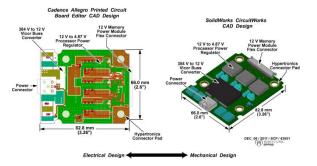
Example of electrical to mechanical 3D CAD translation used in 3DI TTV design
